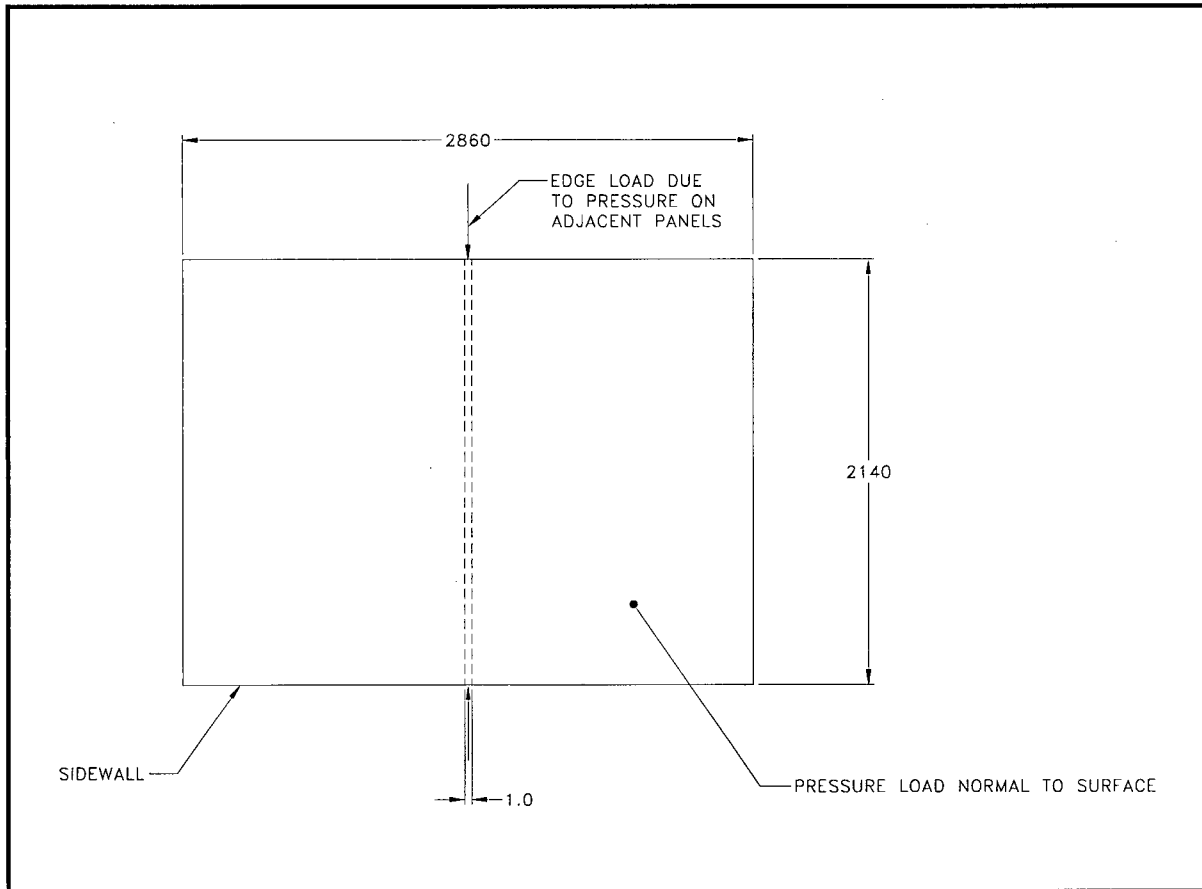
View of Sidewall Showing Strip of Unit Width
